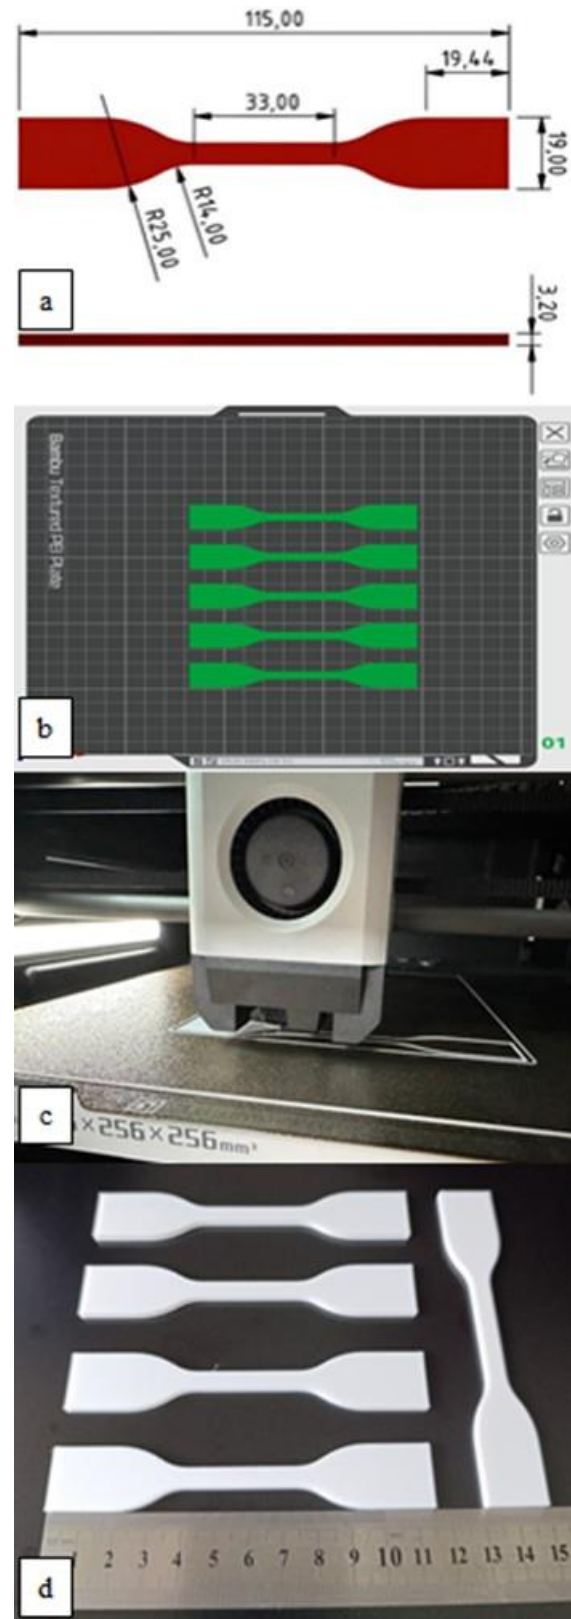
Additive manufacturing steps of the tensile test samples, a) technical drawing of the tensile test sample according to ASTM D638 Type IV, b) view of the samples in slicer software, c) 3D printing process, d) demonstration of the 3D-printed samples.
